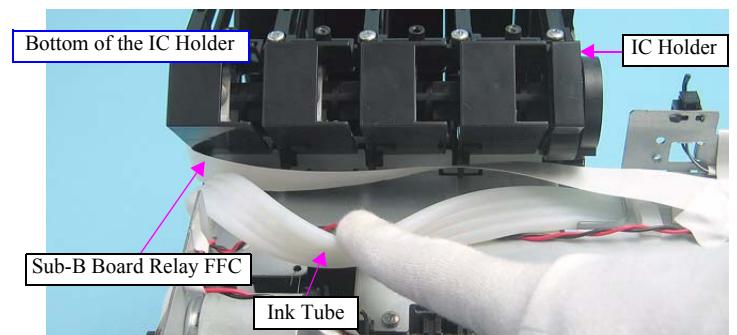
Routing the Sub-B Board Relay FFC and Ink Tube
